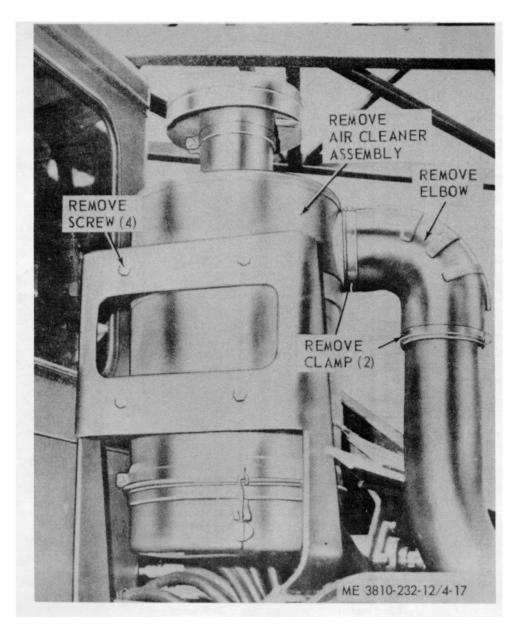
Carrier engine air cleaner, removal and installation (Model 2380)
